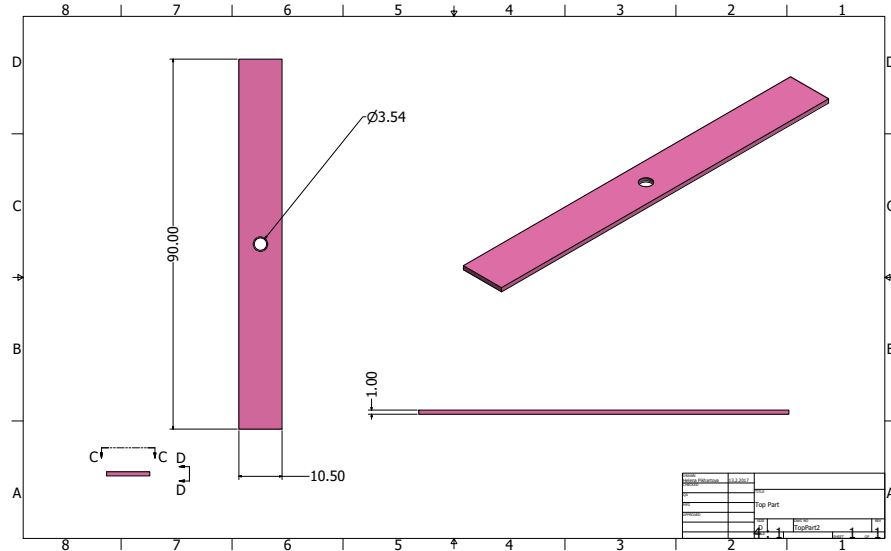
Top part holding scintillator with a tap hole for a bolt. Two of these are necessary for one scintillator.
